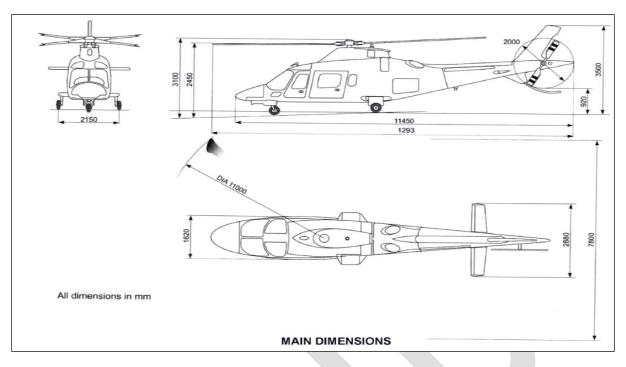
Agusta A109E Helicopter Dimensions (3 view)
